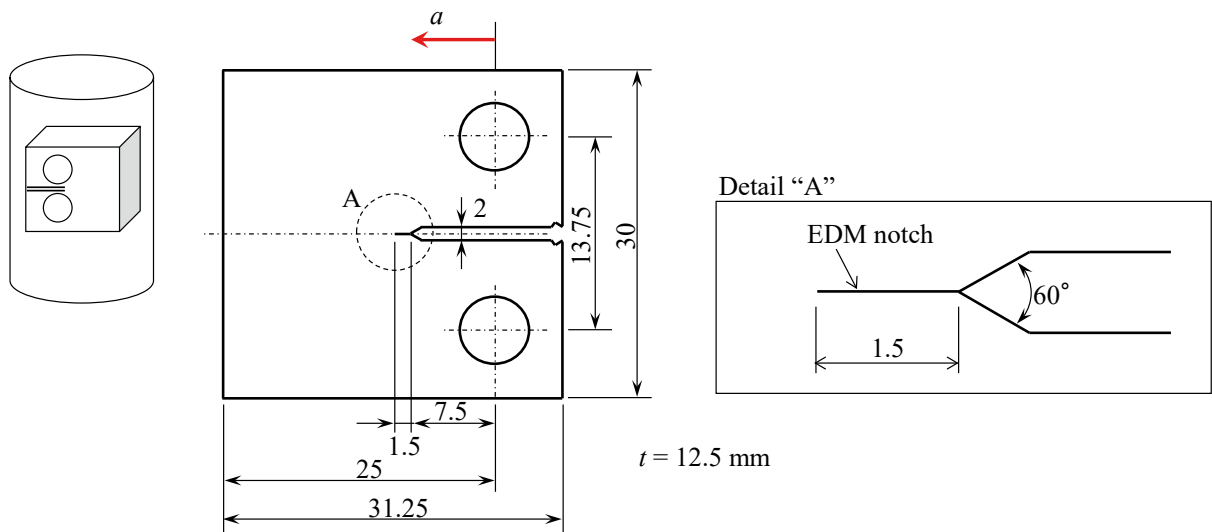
Geometry of compact tension specimens used for crack growth tests (unit: mm).
